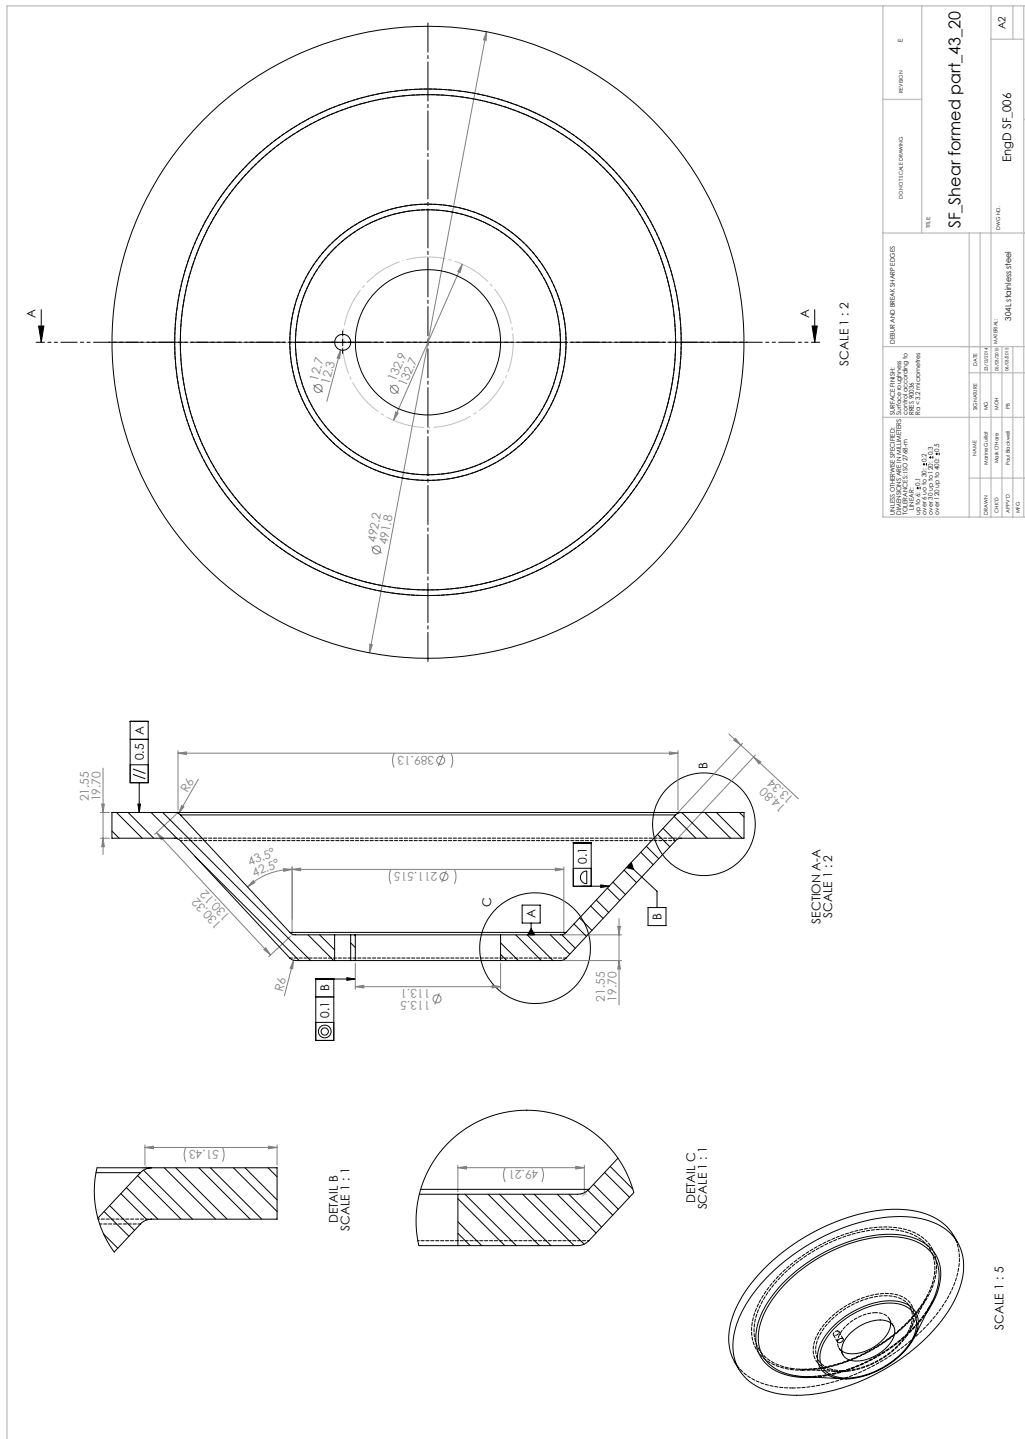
Drawing: Shear formed part – 43°, 20 mm thick, EngD – EngD SF\_006, “SF Shear formed part\_43\_20”.
